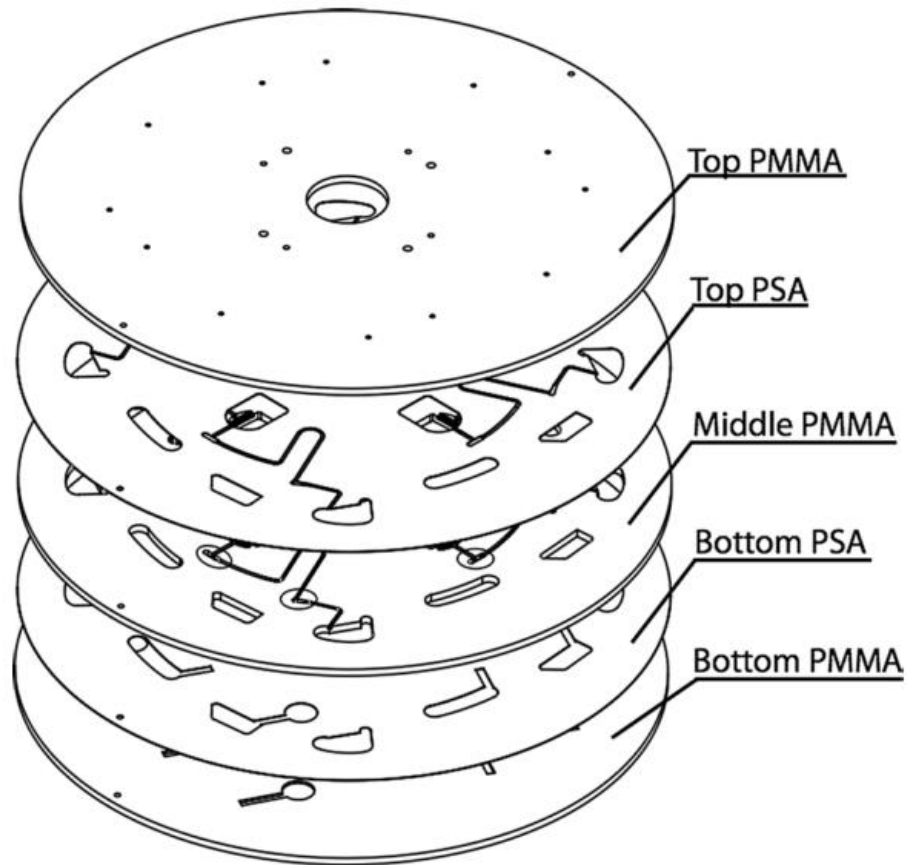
Exploded view of disc assembly. The ( $\varnothing$  120 mm) disc consists of five layers: three PMMA layer and two PSA layers.
